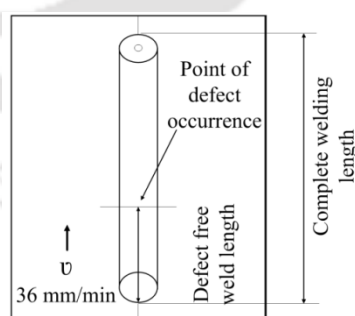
Schematic of detection of defects in the welds through sectioning for defective weld against Exp. No. 65
